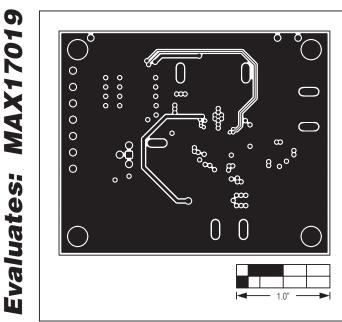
MAX17019 EV Kit PCB Layout—Layer 3
